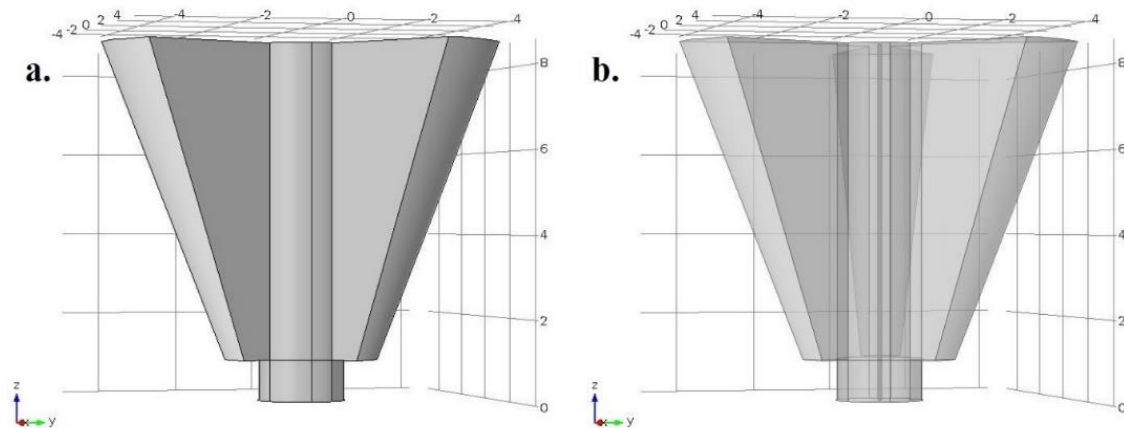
Schematic illustration of inner view of full length spinneret prototype 3, (a. solid view, b. transparent view)
